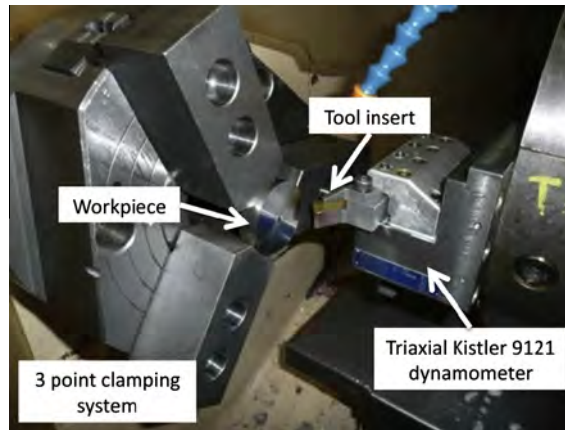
Workpiece specimen and tool insert position in the CNC lathe during the testing.
